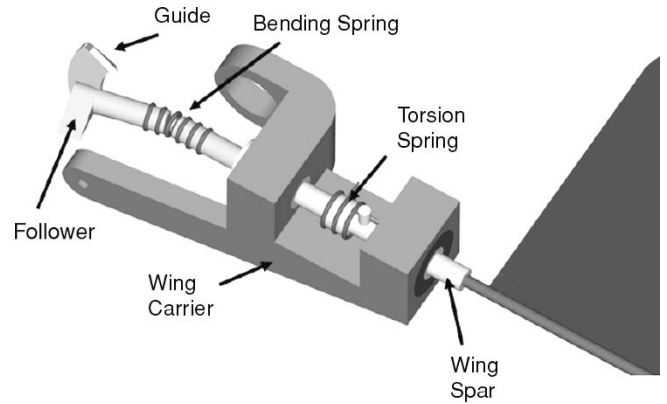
Details of wing carrier assembly. The wing spar passes through the wing carrier and the torsion spring attaches to the wing spar. Also, the bending spring has deformed to allow the follower to move along the guide.
